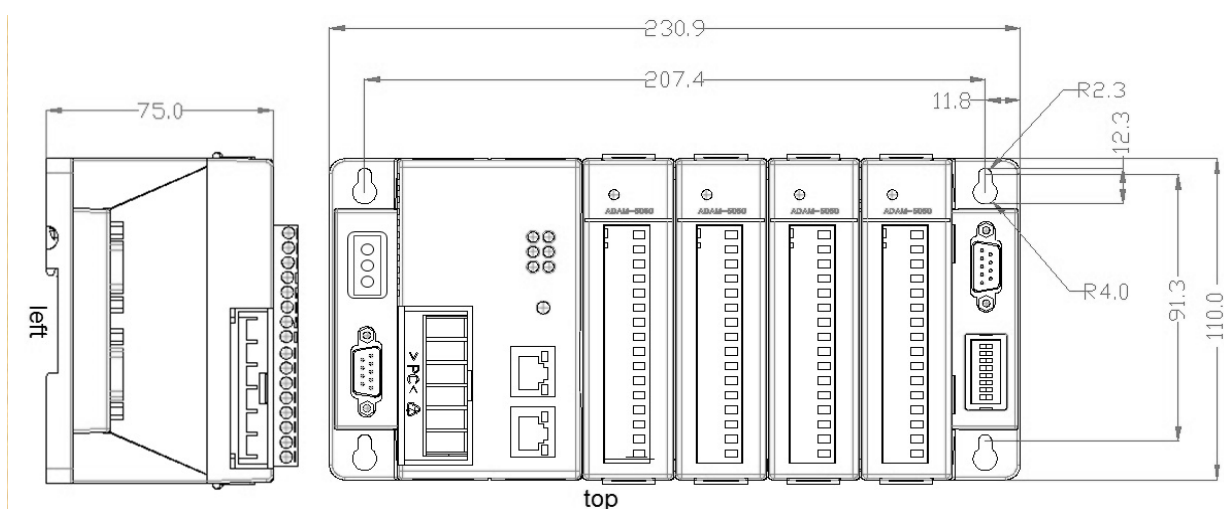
ADAM-5000/ECAT system and I/O module dimensions
